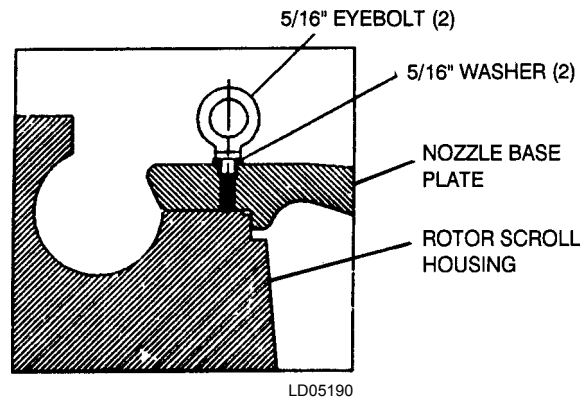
LIFTING NOZZLE BASE PLATE
